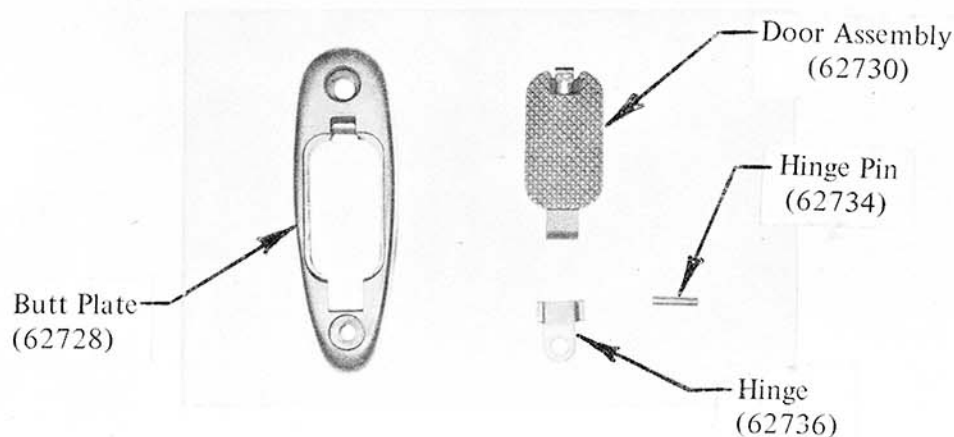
BUTTSTOCK STOWAGE DISASSEMBLY
